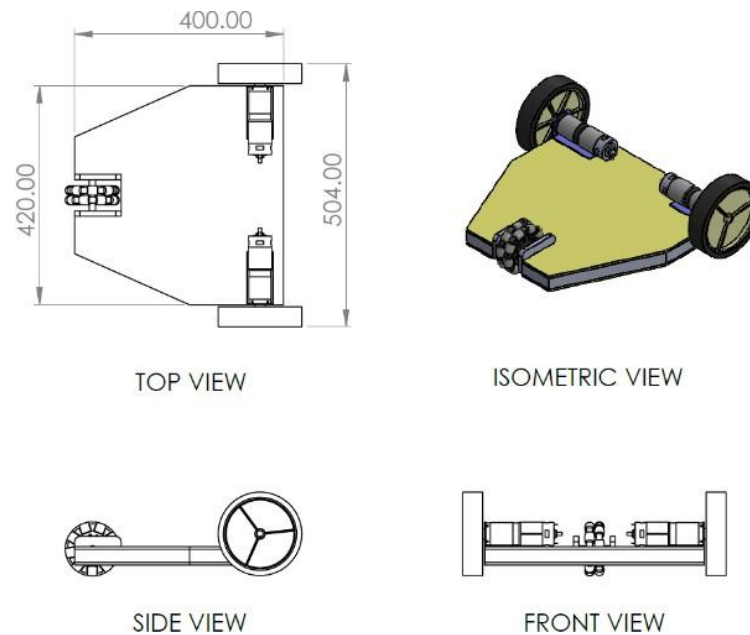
Robot Design Drawing with Top View, Isometric View, Side View and Front View.
